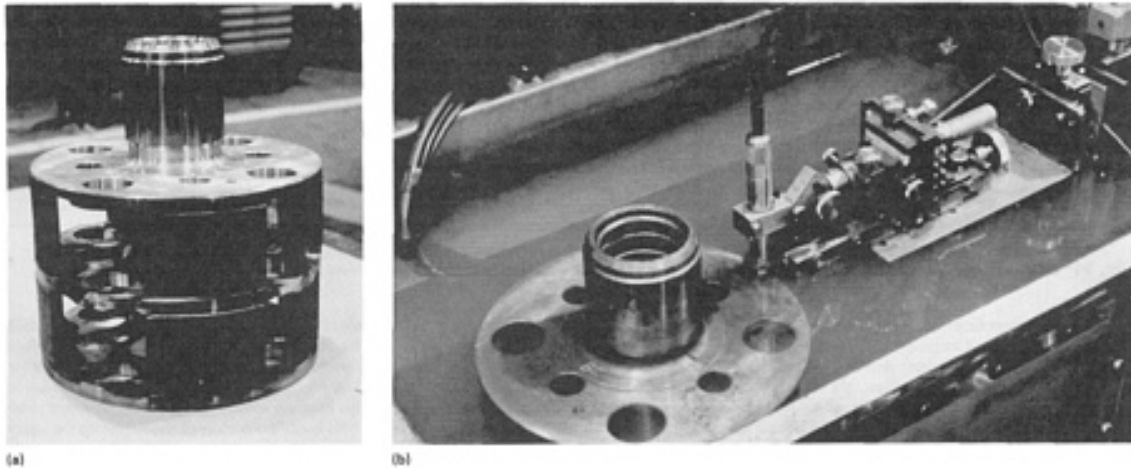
PLANET GEAR CARRIER ASSEMBLY (A) SHOWING THE FOUR WELDS IN ONE STACK THAT CONNECT THE THREE DECKS. THE TOP AND TOP-CENTER WELDS ARE TESTED BY THE TOP ULTRASONIC TRANSDUCER, AND THE BOTTOM AND BOTTOM-CENTER WELDS ARE INSPECTED BY THE BOTTOM TRANSDUCER. (B) CLOSE-UP OF UPPER TRANSDUCER IN POSITION TO TEST THE WELDS. COURTESY OF CATERPILLAR, INC.
